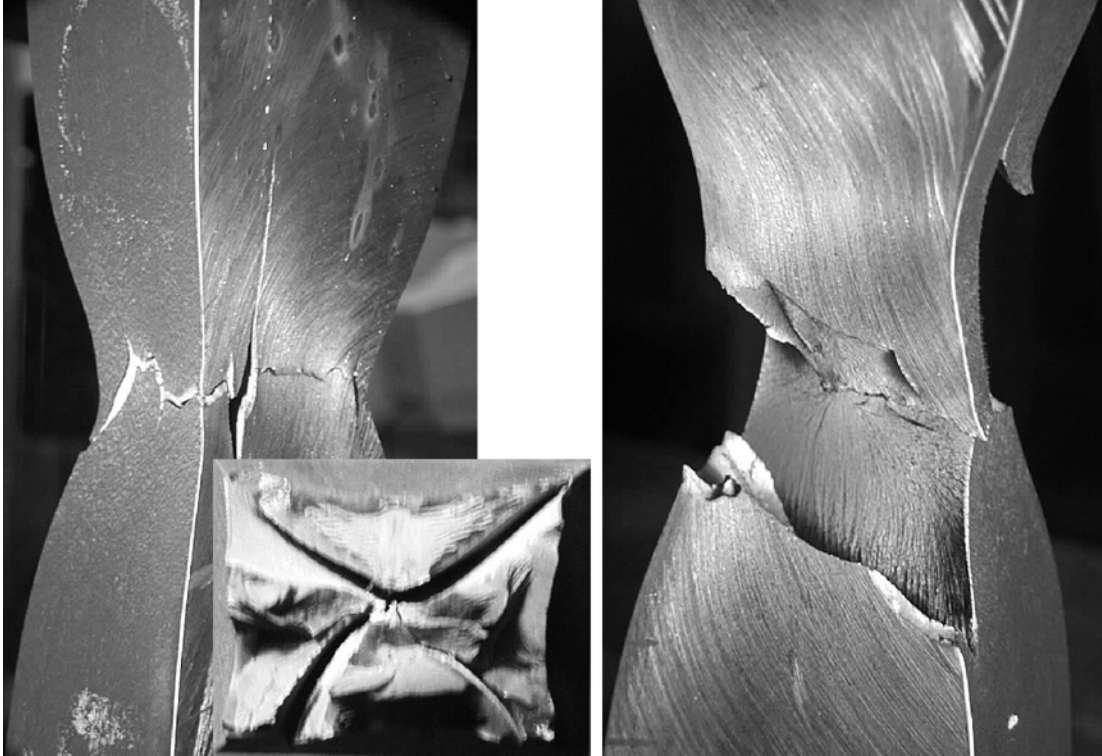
Fracture of HPS(HT) Steel Tension Coupons
